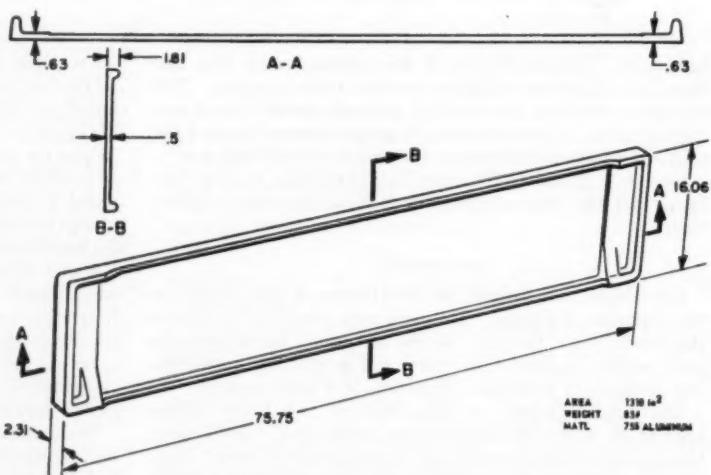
CONSTANT-SECTION SPAR DIE FORGING
